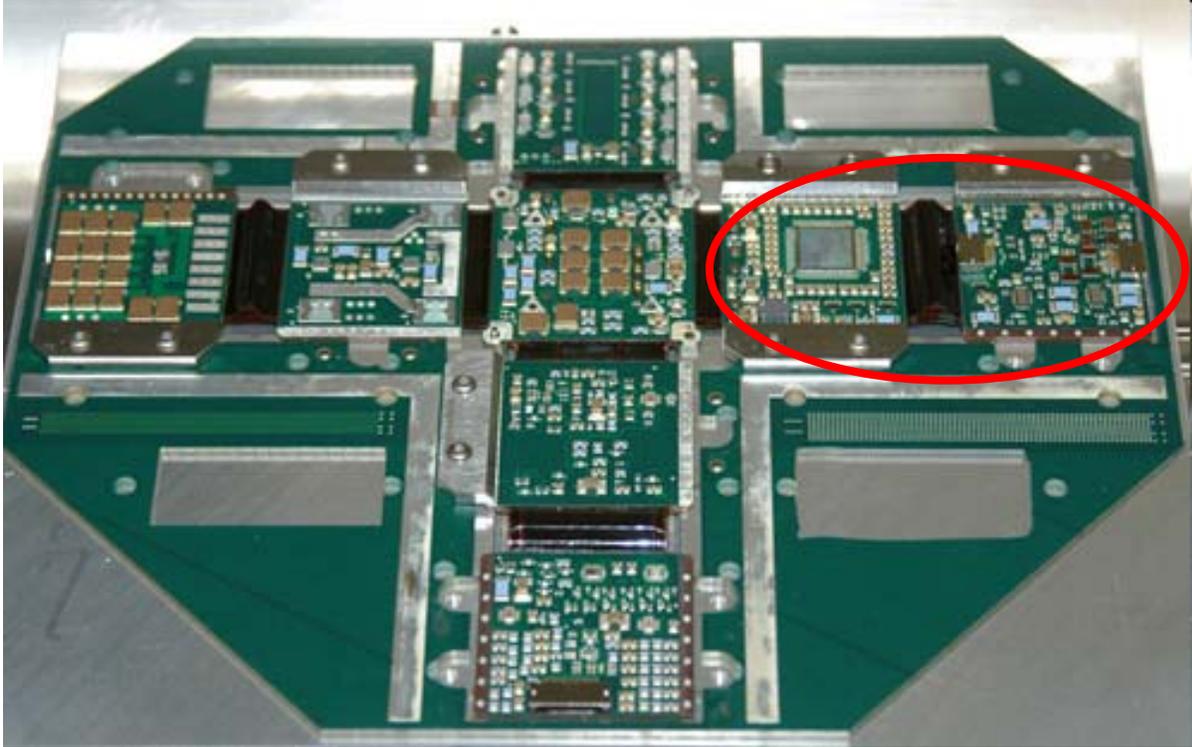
Unfolded PWB version of the assembly showing the rigid-flex connection between each PWB. The section of the design that is being converted to (primarily) embedded passives is circled in red.
